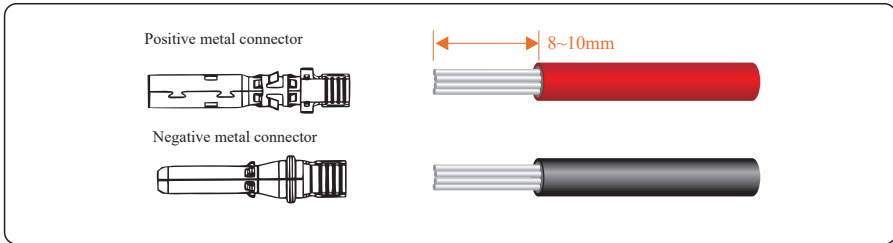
Removing insulation layer for DC cable (unit: mm)
